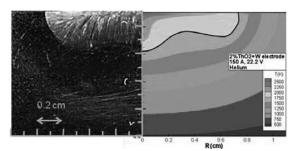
Cross section of the welding bead for a $2\%\text{ThO}_2\text{-W}$ electrode
